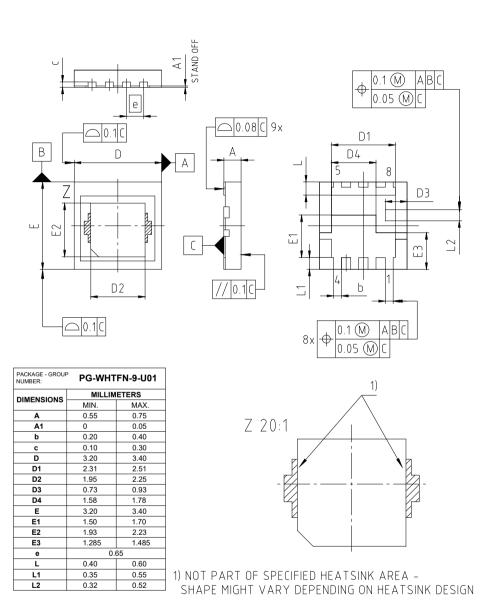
Outline PG-WHTFN-9, dimensions in mm
